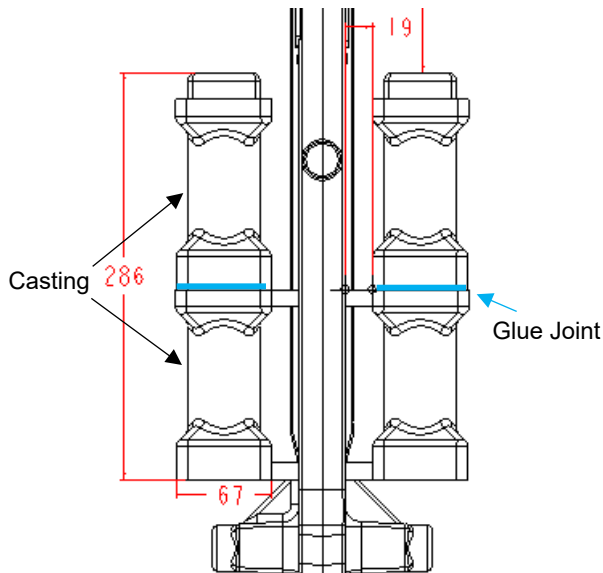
Vertical casting orientation with two patterns glued on top one another with EPLA pattern (left) and EPS (right). Castings are bottom filled with same gating as Figure 6 for the bottom casting only. Dimensions in red (mm).
